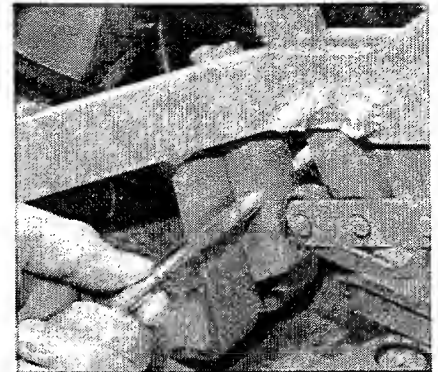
With Wheels/Tines/PTO Drive Lever in NEUTRAL, insert tool through hole in adjustment block.
